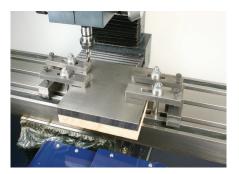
Clamps in positions where they will not obstruct the cutter machining the rear face..
